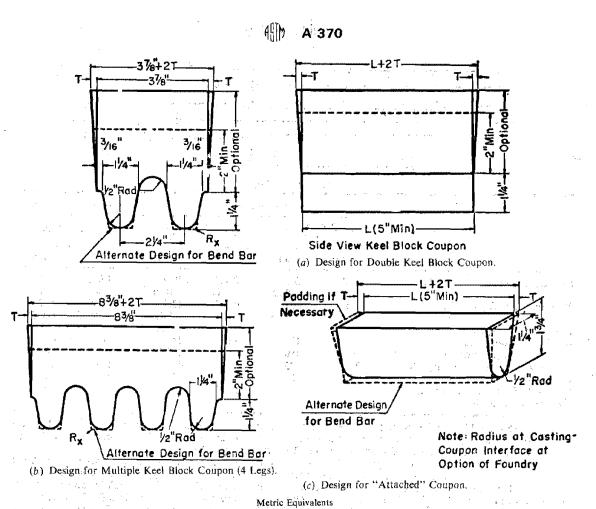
Test Coupons for Castings (see Table 1 for Details of Design).
